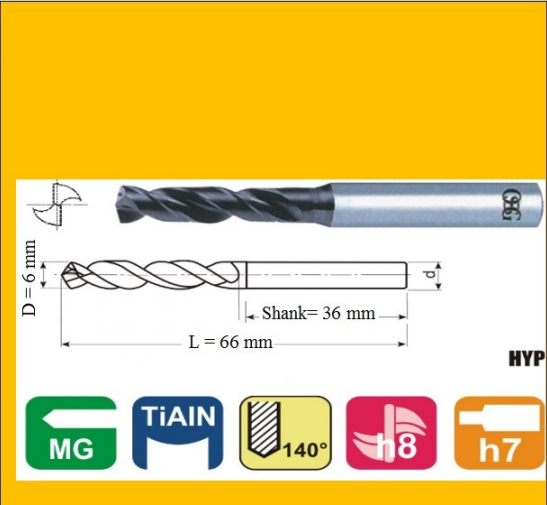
HYP-HP-3D cutting tool from OSG (courtesy of OSG)
